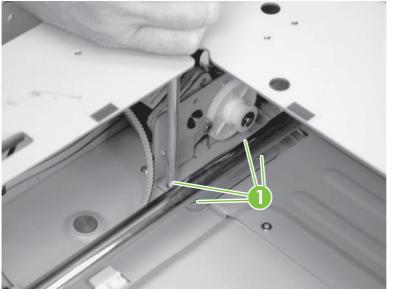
Remove pulley assembly and motor unit (4 of 5)
